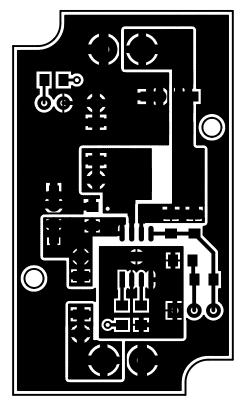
SMPS PCB Copper Pattern (Top Layer)
